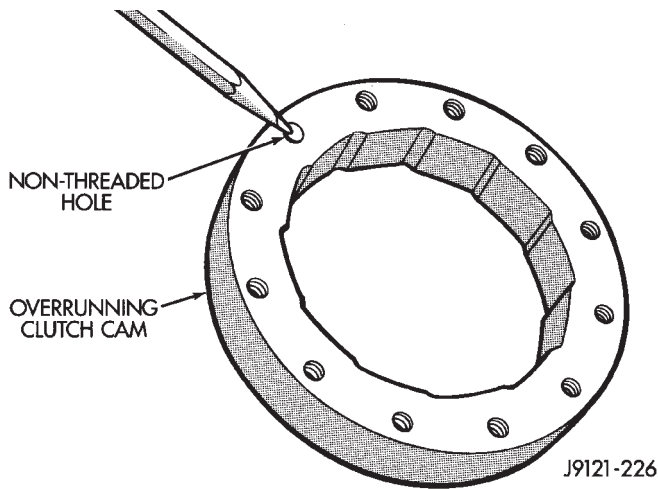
Location Of Non-Threaded Hole In Clutch Cam
